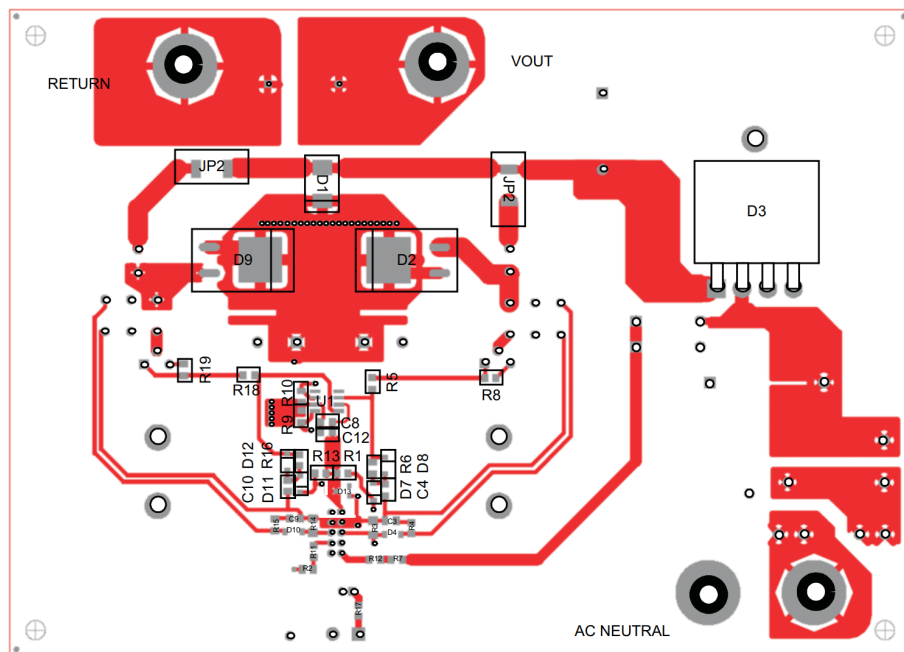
Motherboard of UCC28070EVM bottom assembly [28]. Reprinted with permission.
